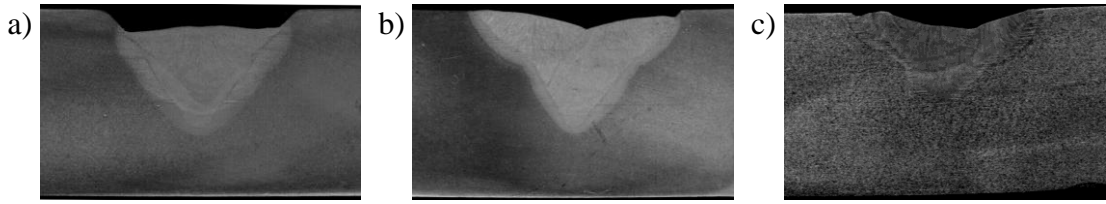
Macro-sections: a) 2-pass weld; b) 4-pass weld; c) 8-pass weld
